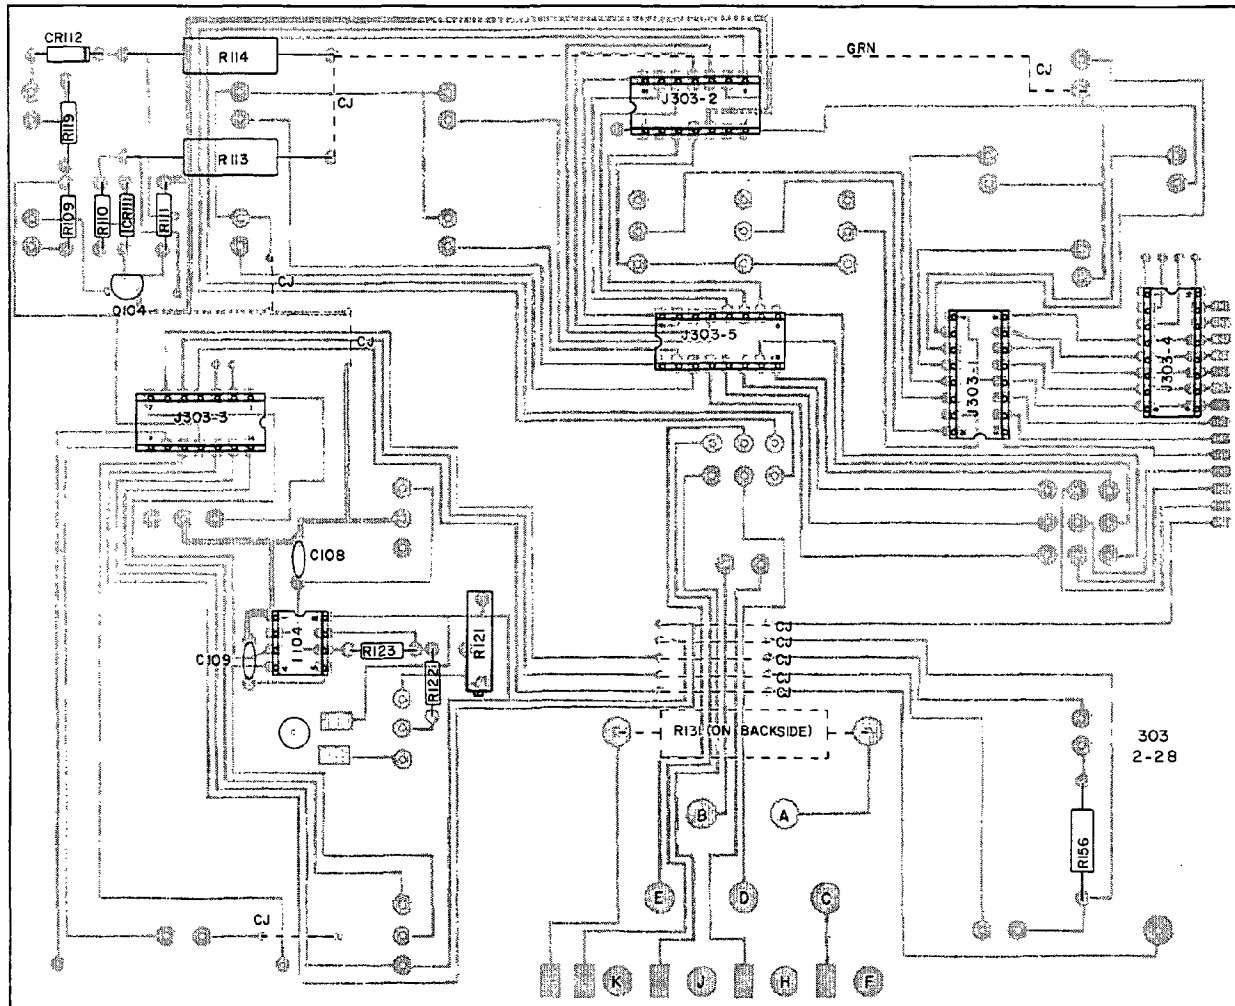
P.C. BOARD ASSEMBLY, BOARD 303, DRAWING
